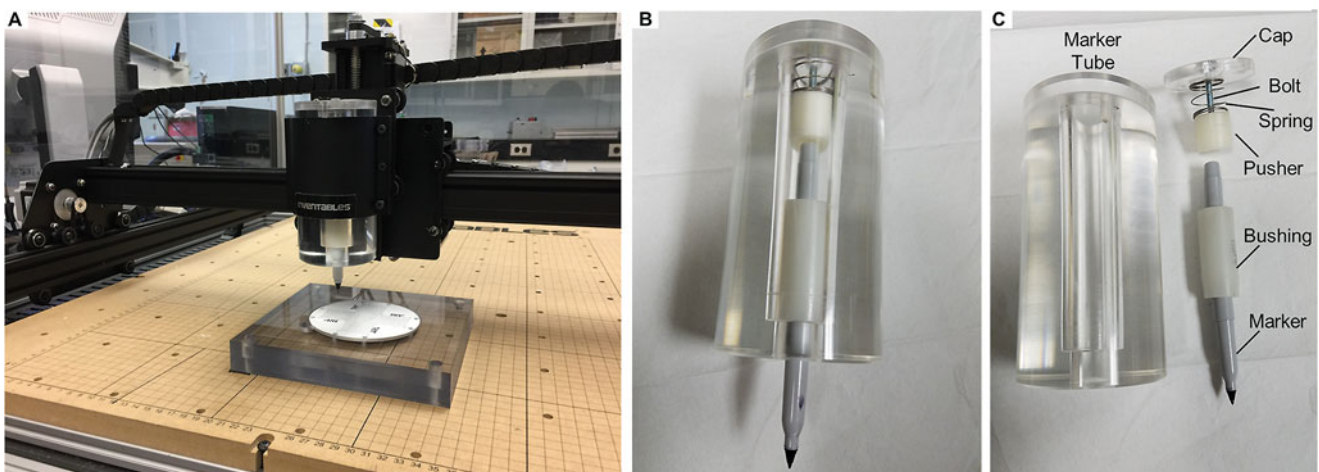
(a) Image of automated speckle generator which is composed of a 3-axis mill with spring-actuated marker holder mounted to the Z-axis motor, (b) marker holder assembly and (c) an exploded view of the marker holder
